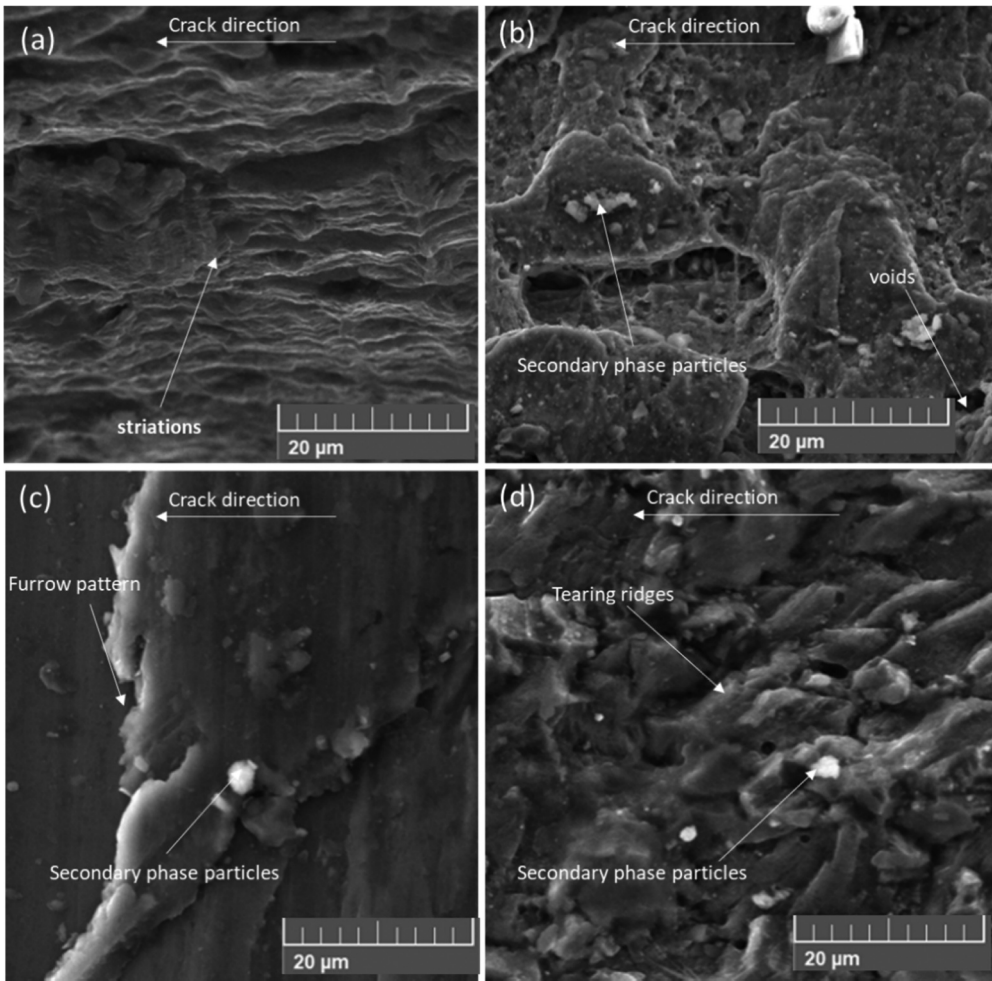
Final fatigue fracture morphology of Al alloy, (a) 7075-O countersunk rivet hole, (b) 7075-O perpendicular rivet hole, (c) 7075-T6 countersunk rivet hole, (d) 7075-T6 perpendicular rivet hole.
